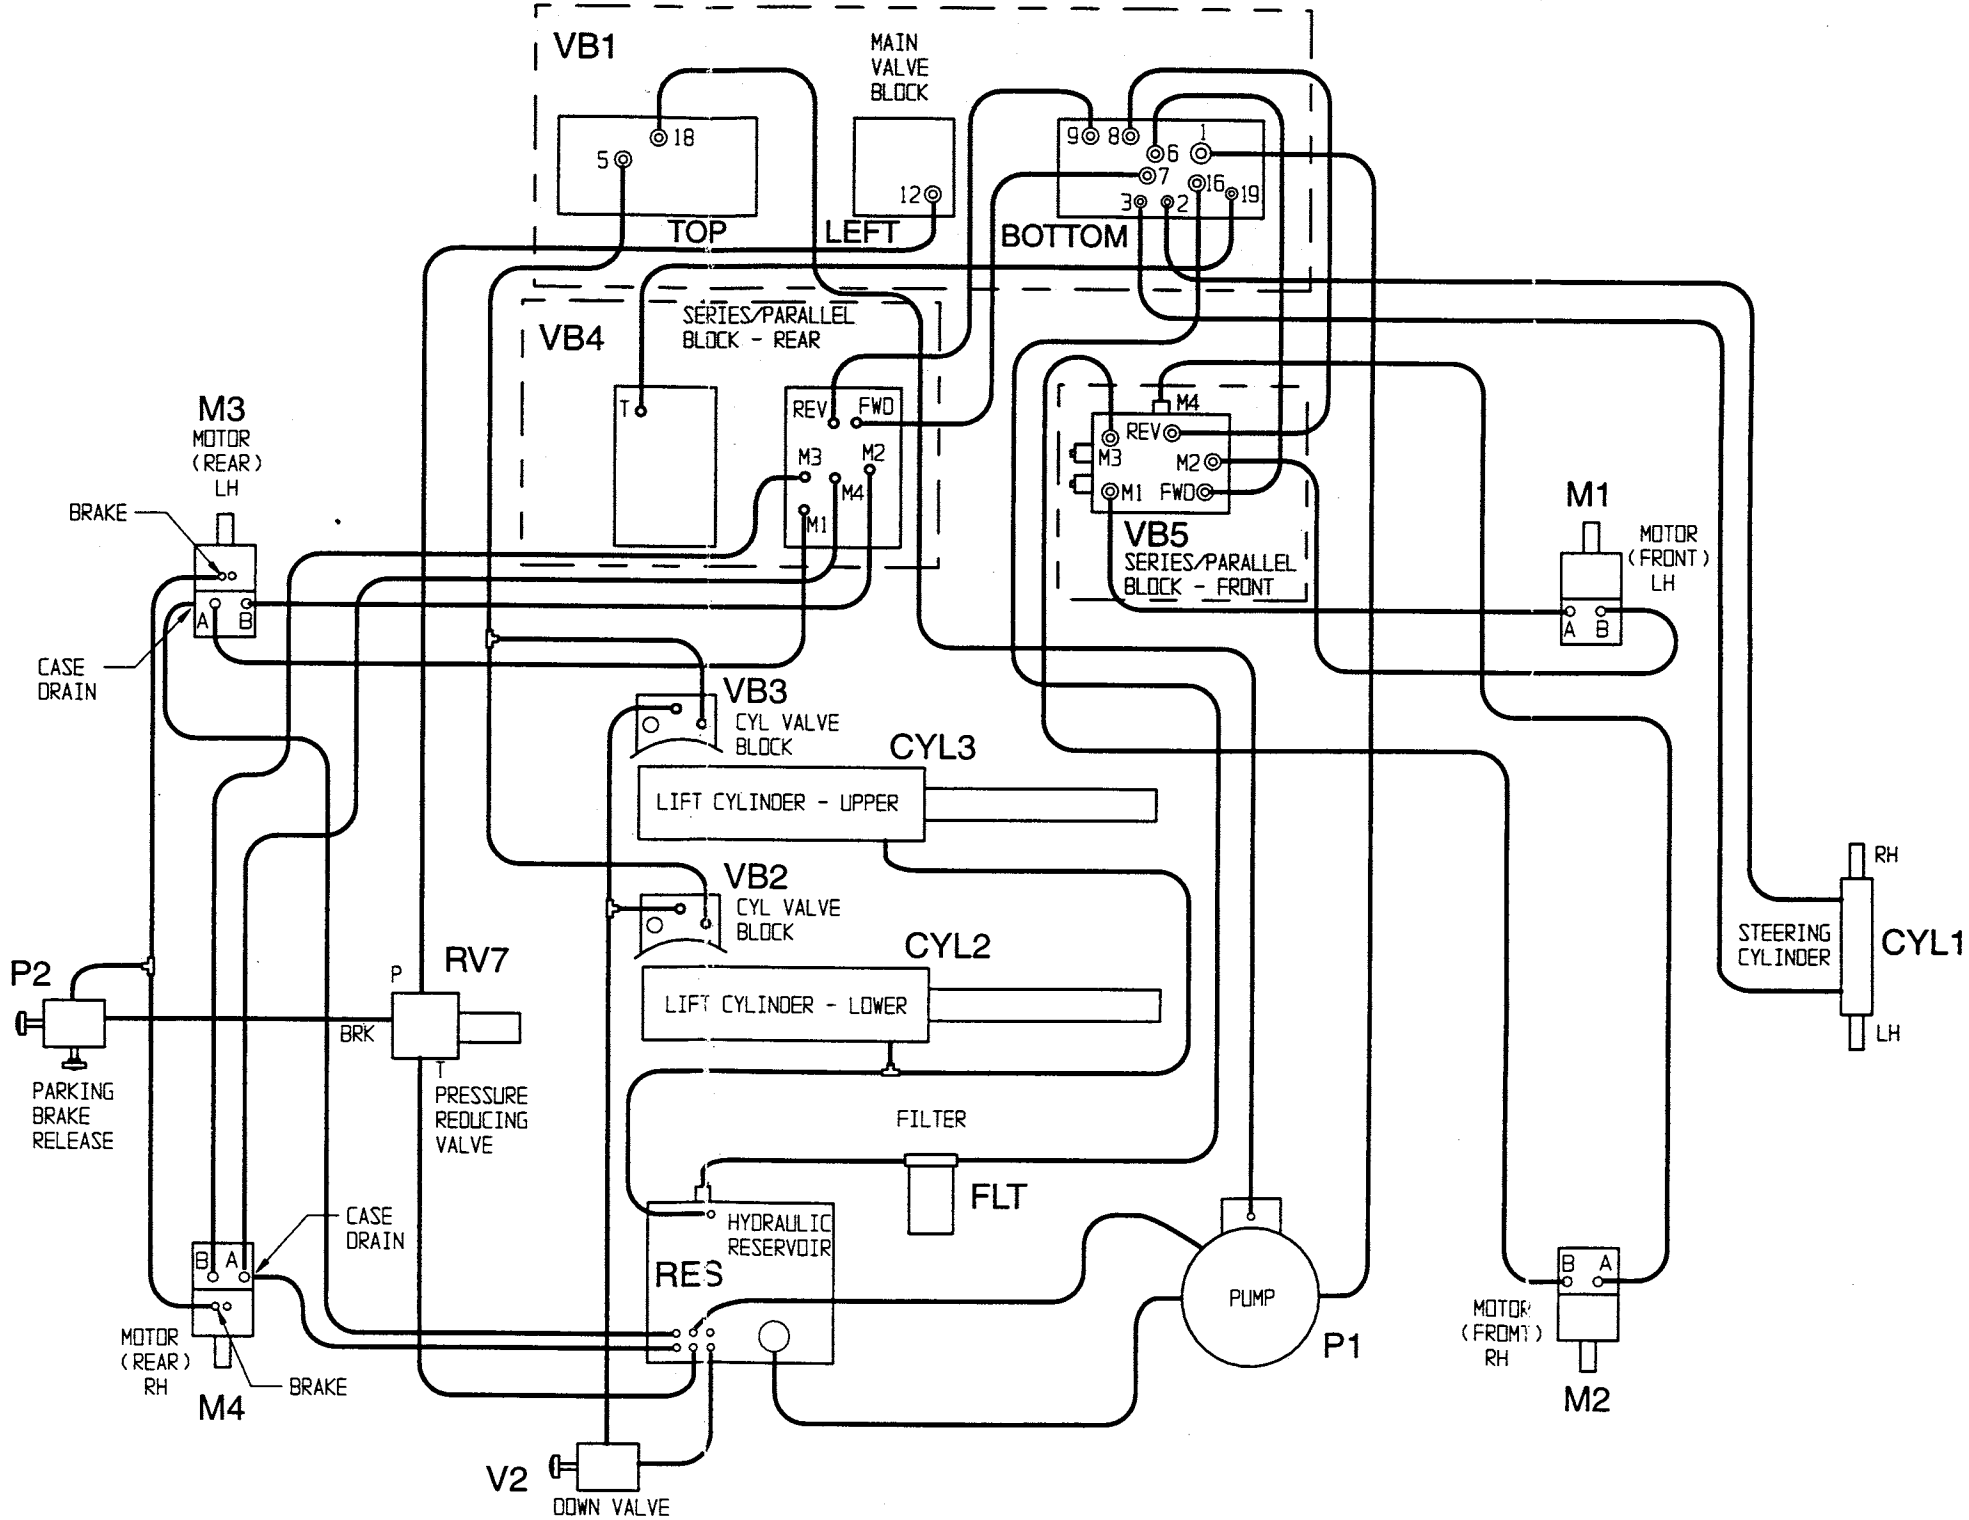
Hose Routing, XRT33 4-Wheel Drive
